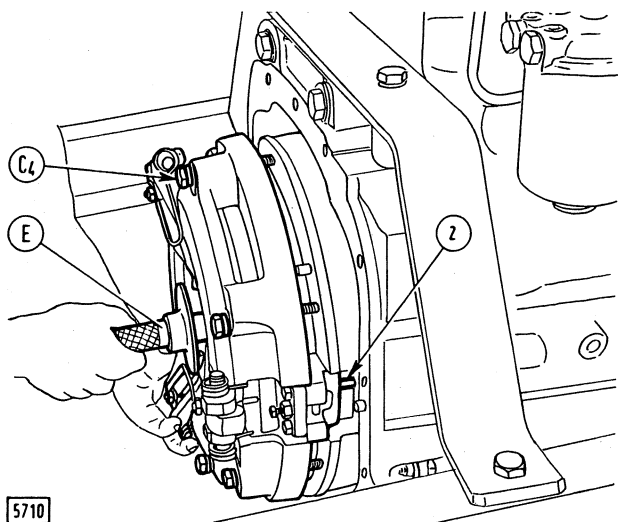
Removing (refitting) the 10" clutch from the engine flywheel using the alignment spigot A 117163 (E).
